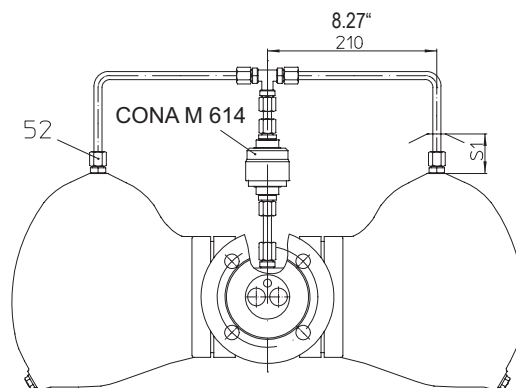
1 with flanges - horizontal installation and äußere Entlüftung
